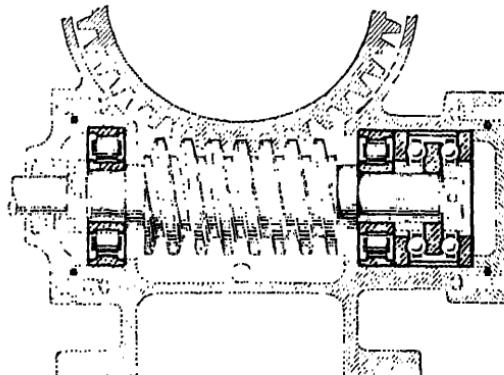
Commercial drawing of a worm gear assembly. The Norma Co. of America, New York.
